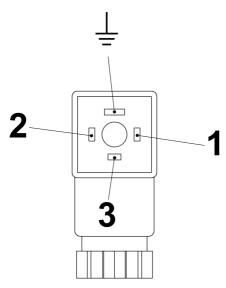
Pin assignment, plug socket, change-over contact (Form 15x50)
